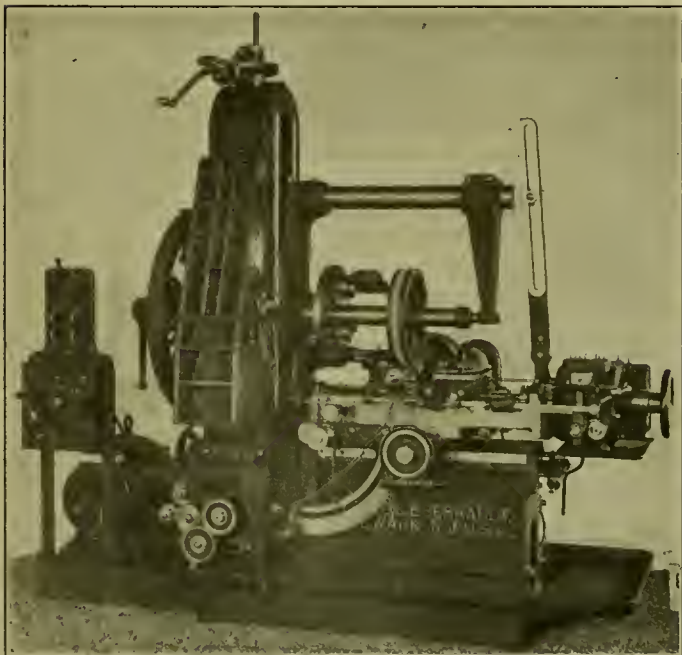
AUTOMATIC GEAR CUTTING MACHINE, WITH SELF-CONTAINED MOTOR DRIVE.—GOULD & EBERHARDT.
